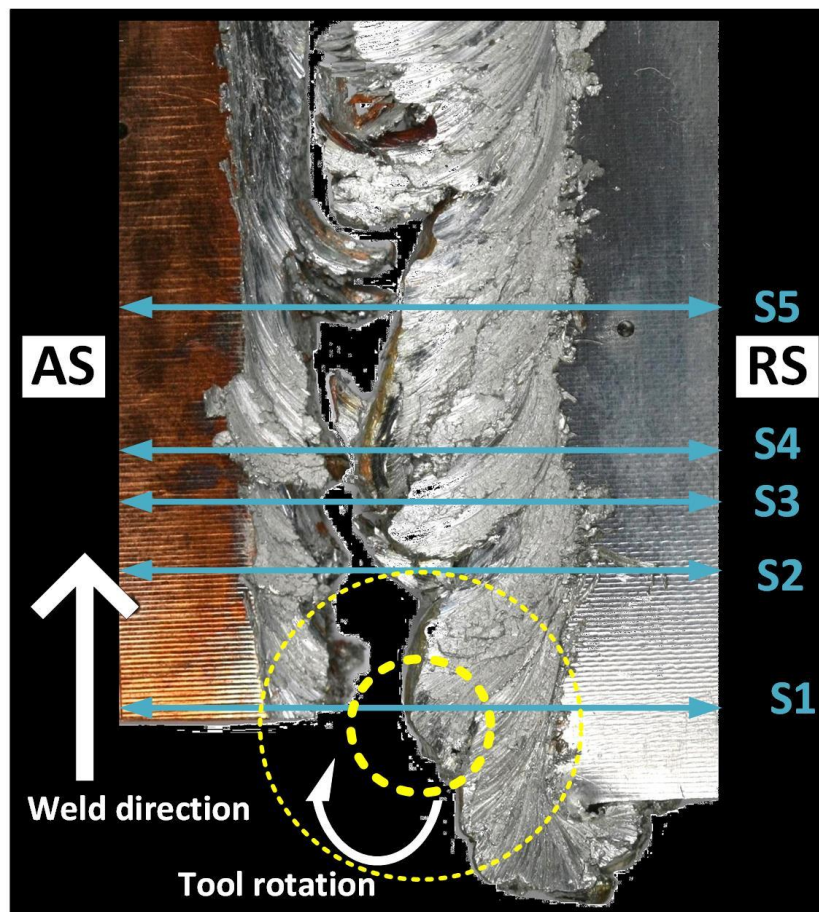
Visual surface analysis of the Al-Cu hybrid BFSW weld. The top-view of the weldment; CP copper plate on the AS (left) and AA6082-T6 aluminium plate on the RS (left)
